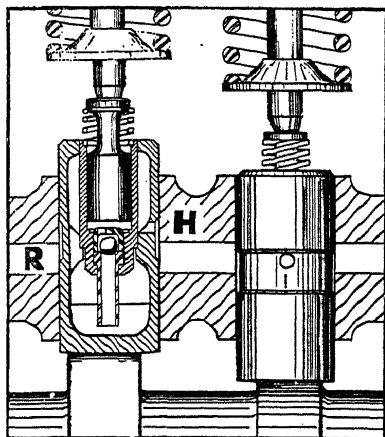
Hydraulic valve stem clearance automatic adjusting device.
